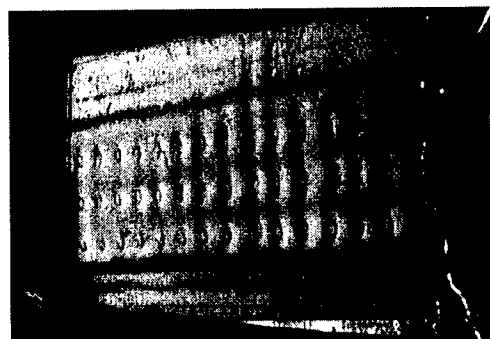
D Sight image of pillowing in 727 specimen. (R.Gould)
